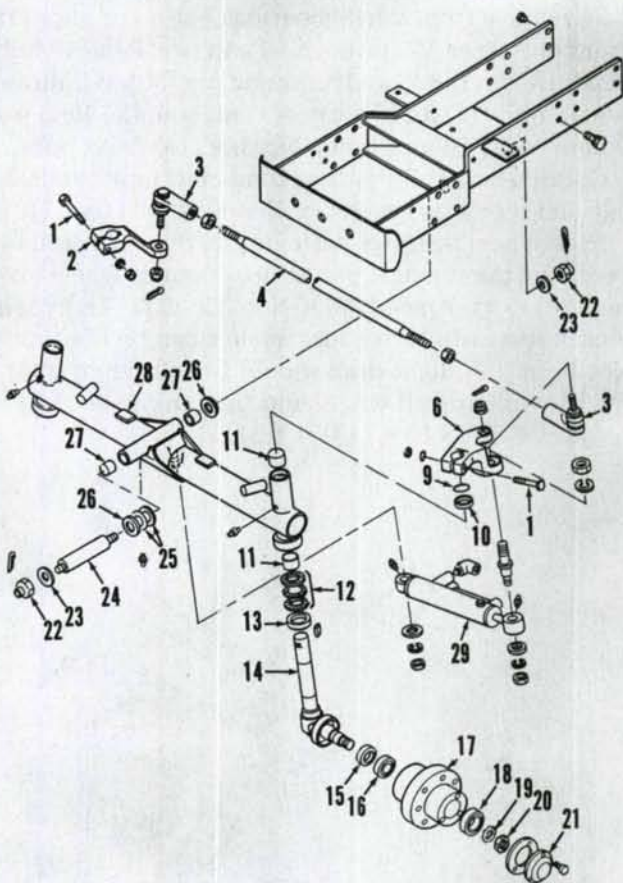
Exploded view of fixed tread width front axle assembly used on Models 1120 and 1220 equipped with power steering.
